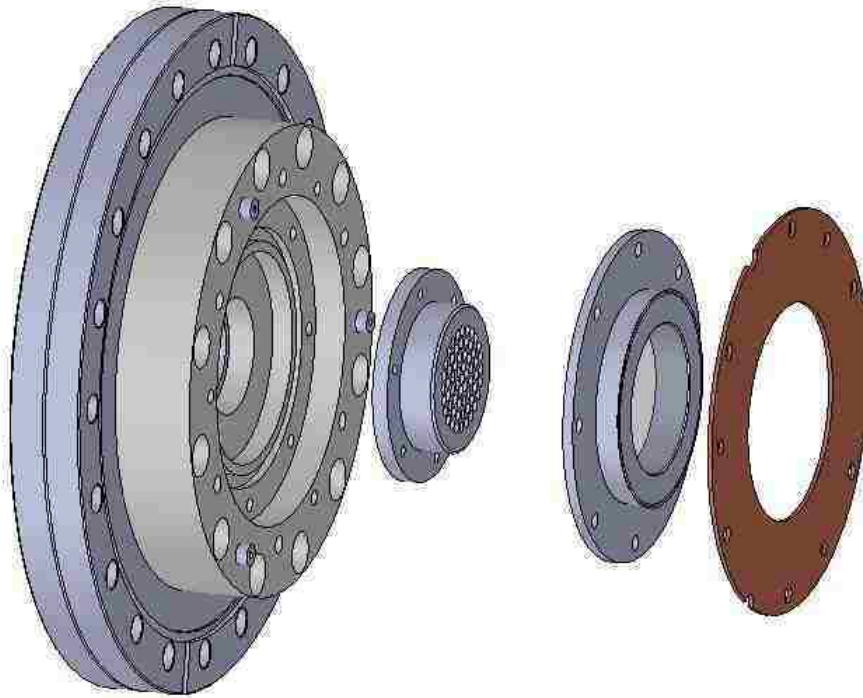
Exploded solid CAD model of the window-cathode sub-assembly.
